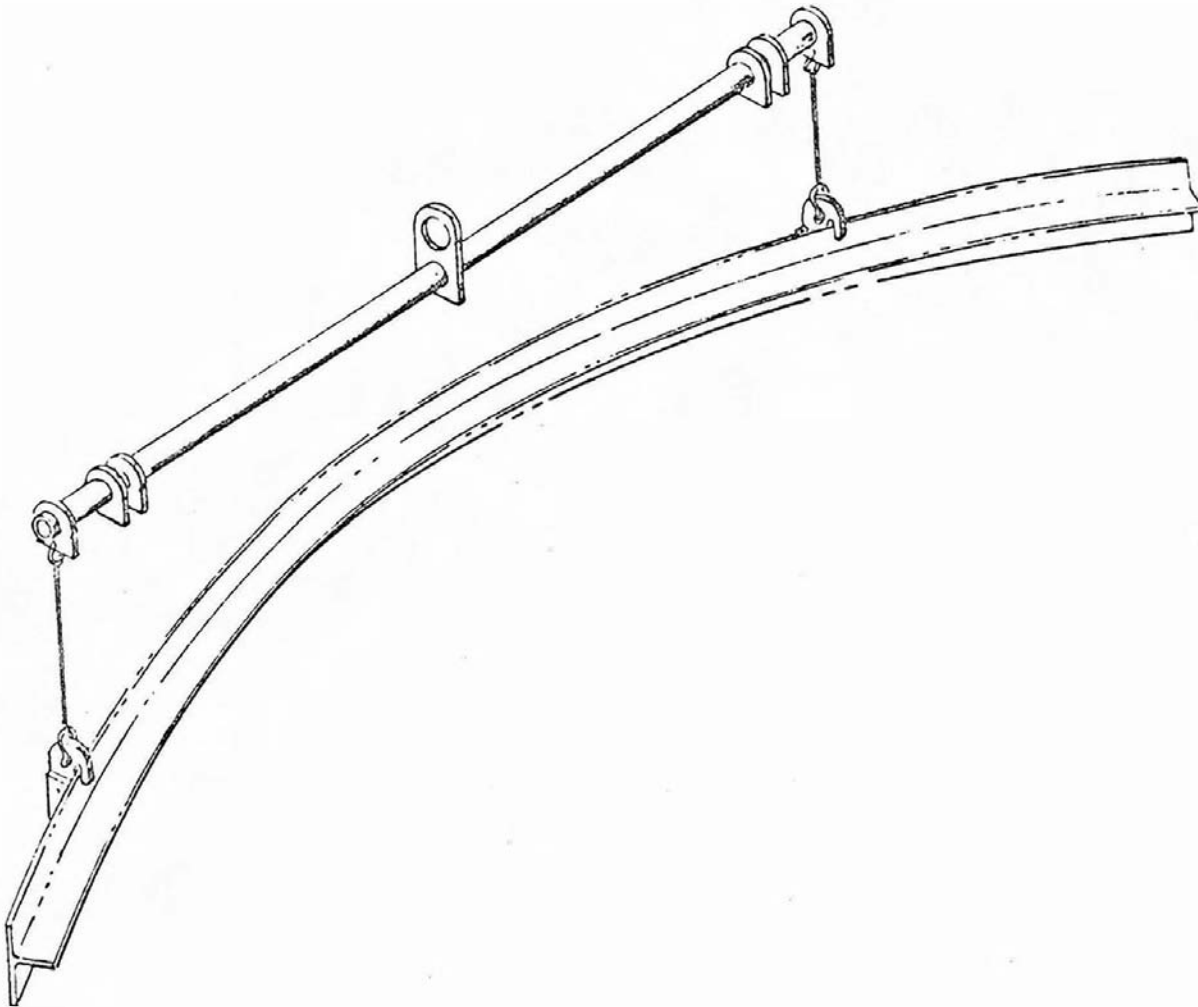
Upper and Lower Thrust Ring Tee Caps Hoisting Tool
